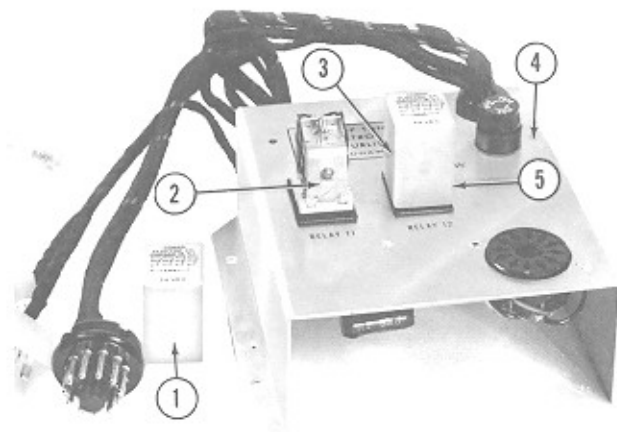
TOP TUNE CONTROL UNIT ASSEMBLY
